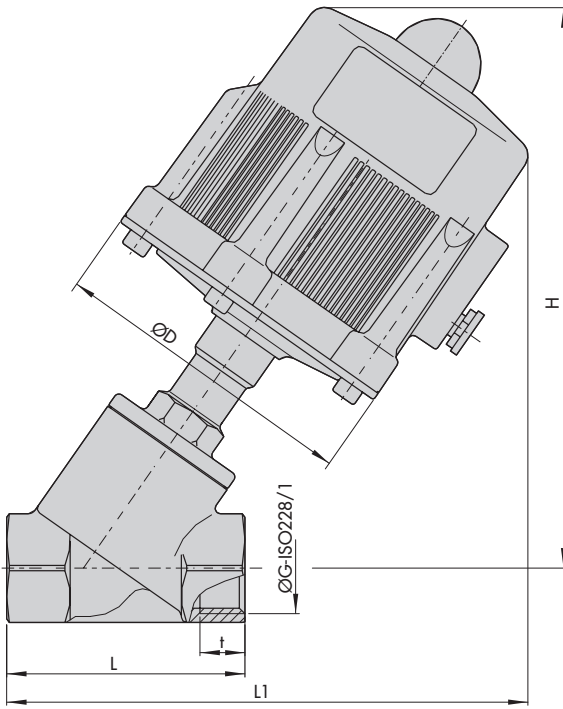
· Type 3353 Angle Seat Valve with female thread
